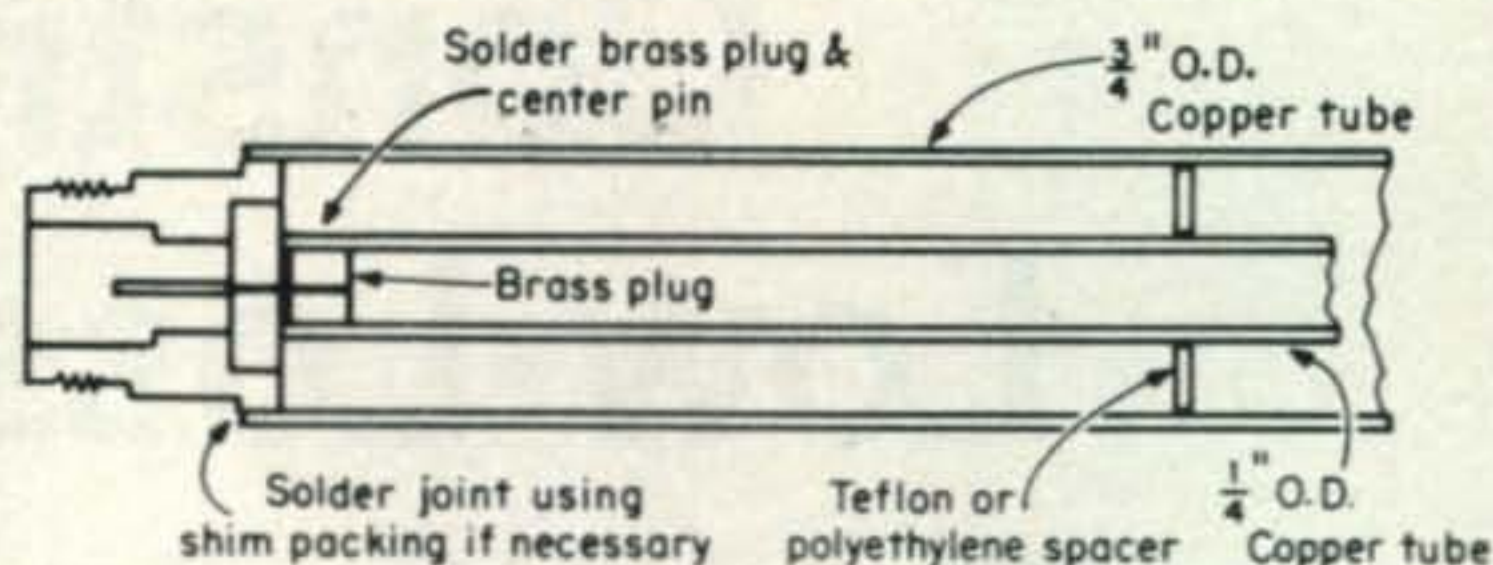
Assembly of Type N connector section to homebrew rigid copper coax.
